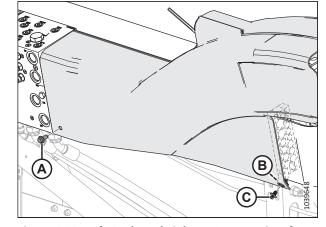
Left Outboard Linkage Cover – View from Rear of Header
